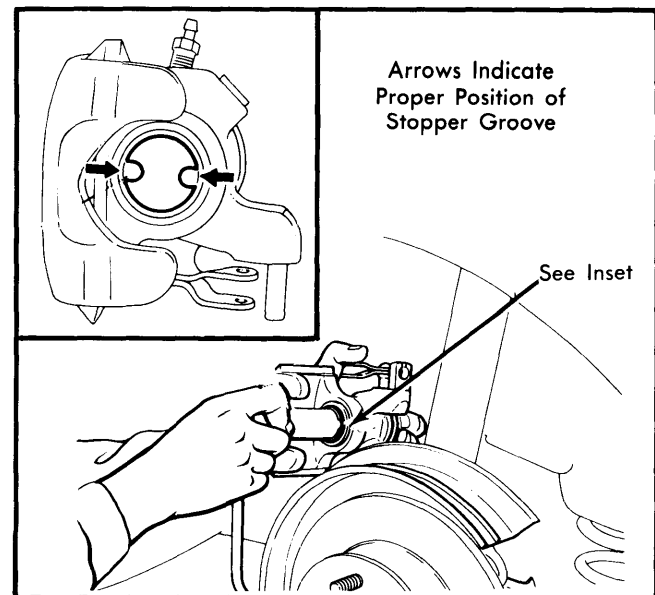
Positioning of Piston Stopper Groove on Rear Disc Brakes
